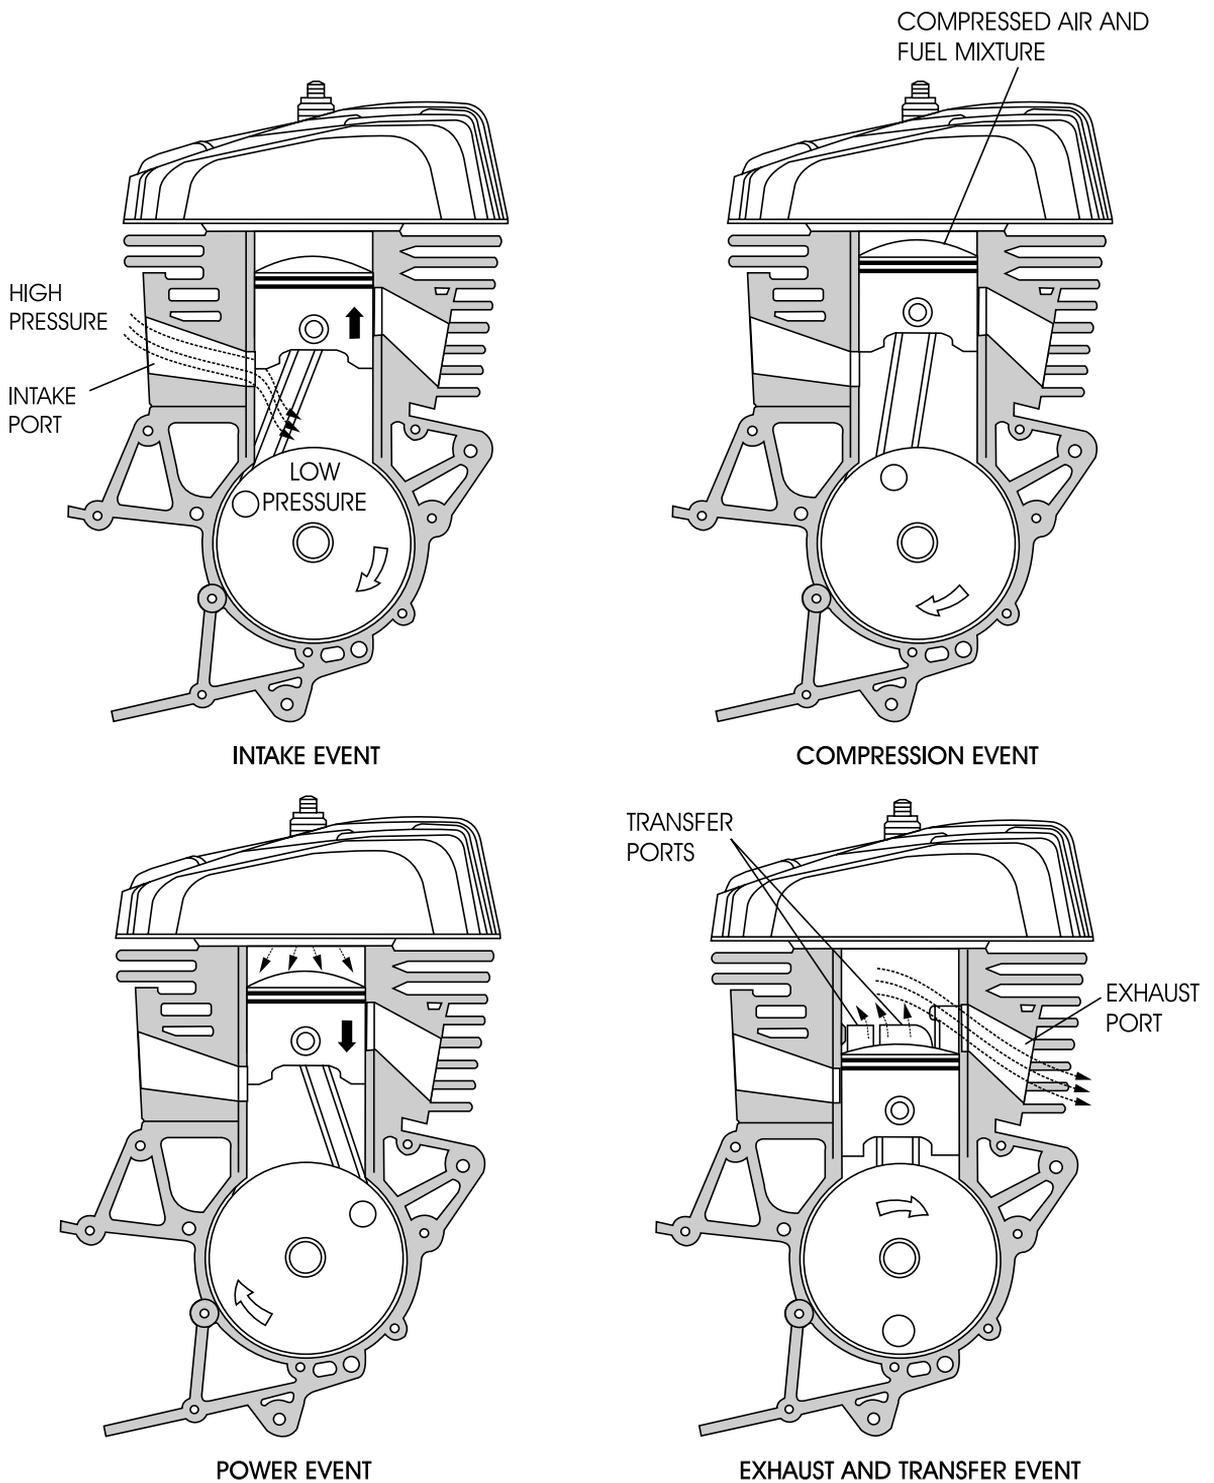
This illustration shows the five events that occur in one crankshaft revolution on a two-stroke engine. (Courtesy of American Suzuki Motor Corporation)
